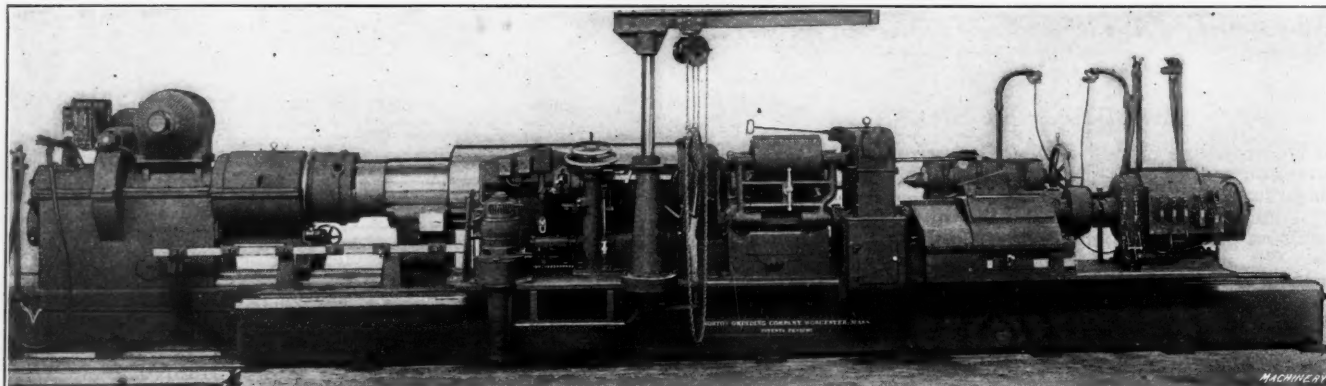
Front View of Norton Roll Grinding Machine showing Roll in Position for grinding
